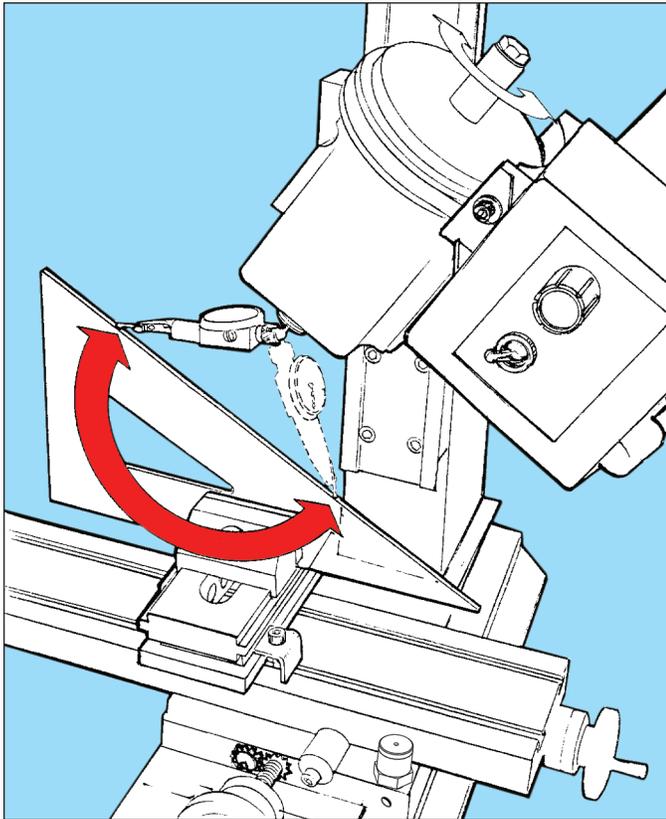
Indicating in a 30° head tilt using a mill vise and draftsman's triangle
